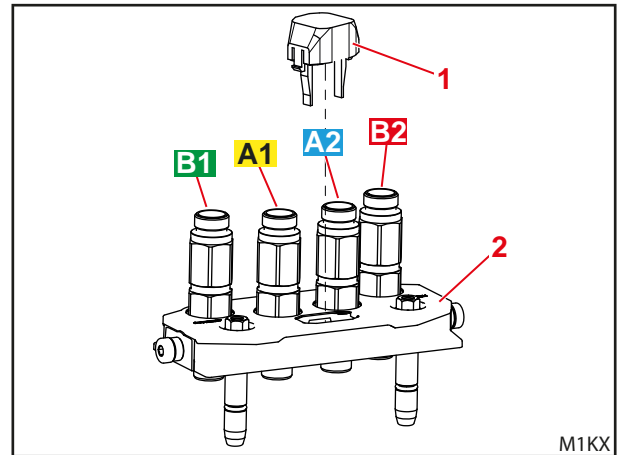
Inserting the stopper cap (front loader without electrical system)
